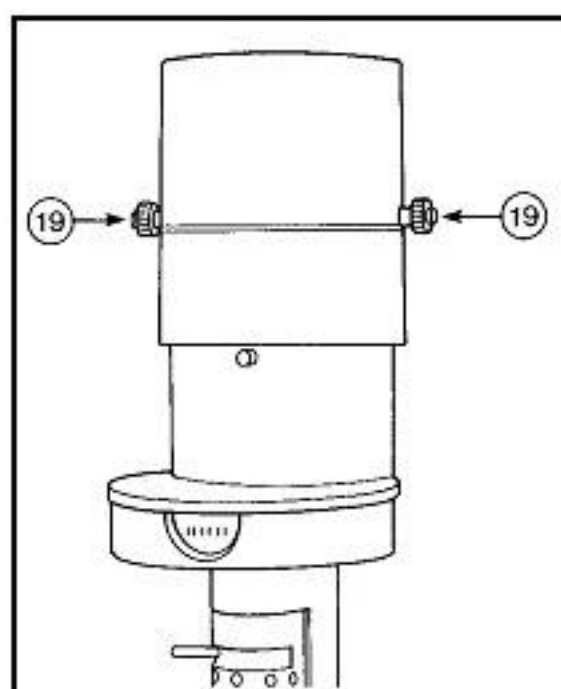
Lamp Housing Cover Retaining Nuts, 19
